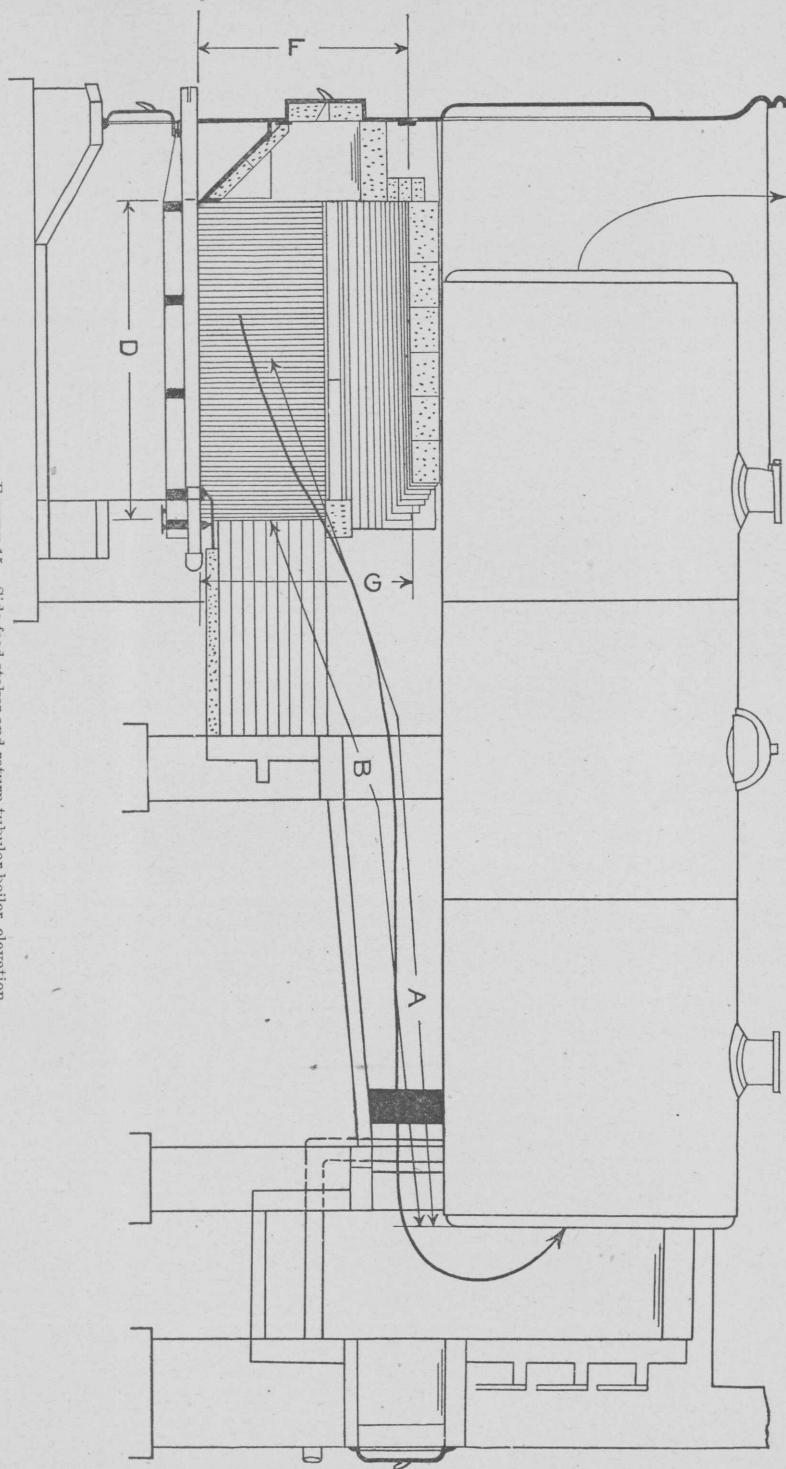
Side-feed stoker and return tubular boiler, elevation.
